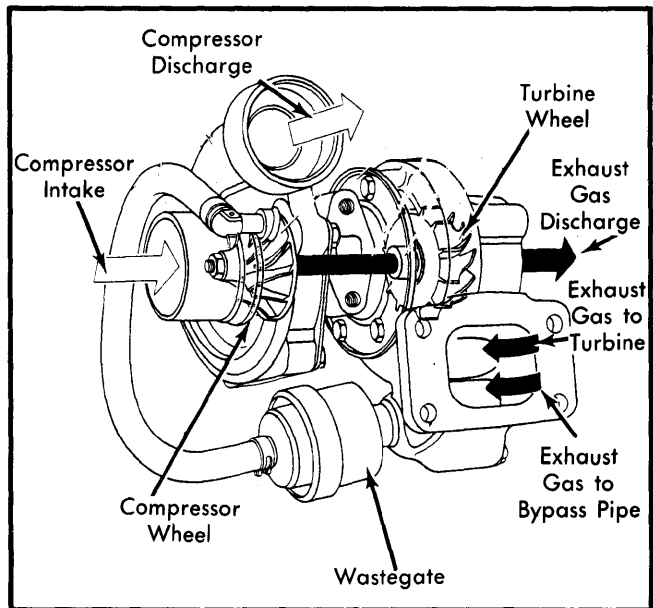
Cutaway View of Garrett Turbocharger Used on Mercedes-Benz Diesel Engine
